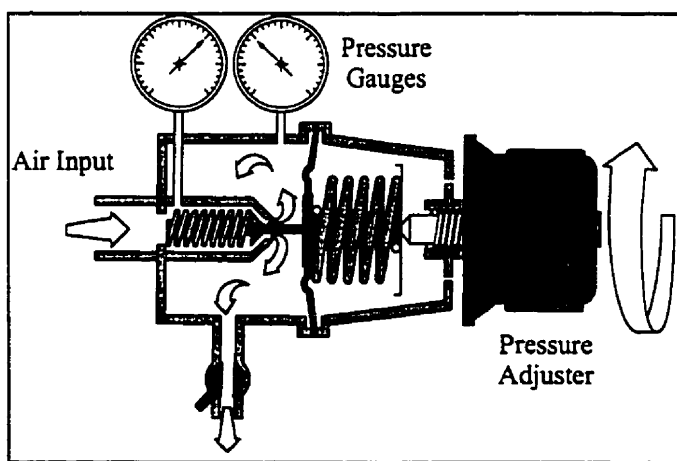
Pressure reducing valve mechanism (Adapted from Dupuis 1992)
